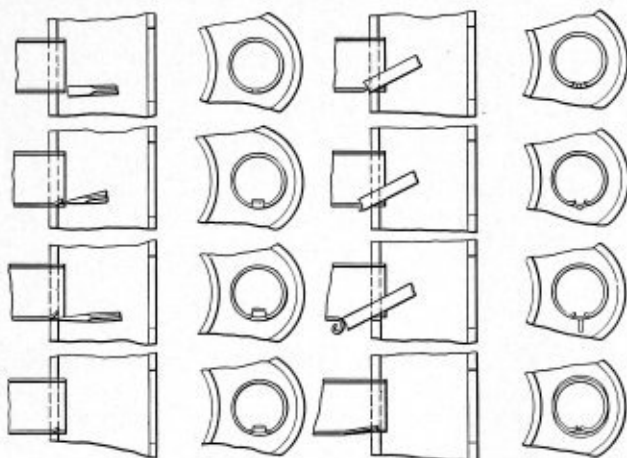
Showing Series of Operations in Cutting Out Tubes
